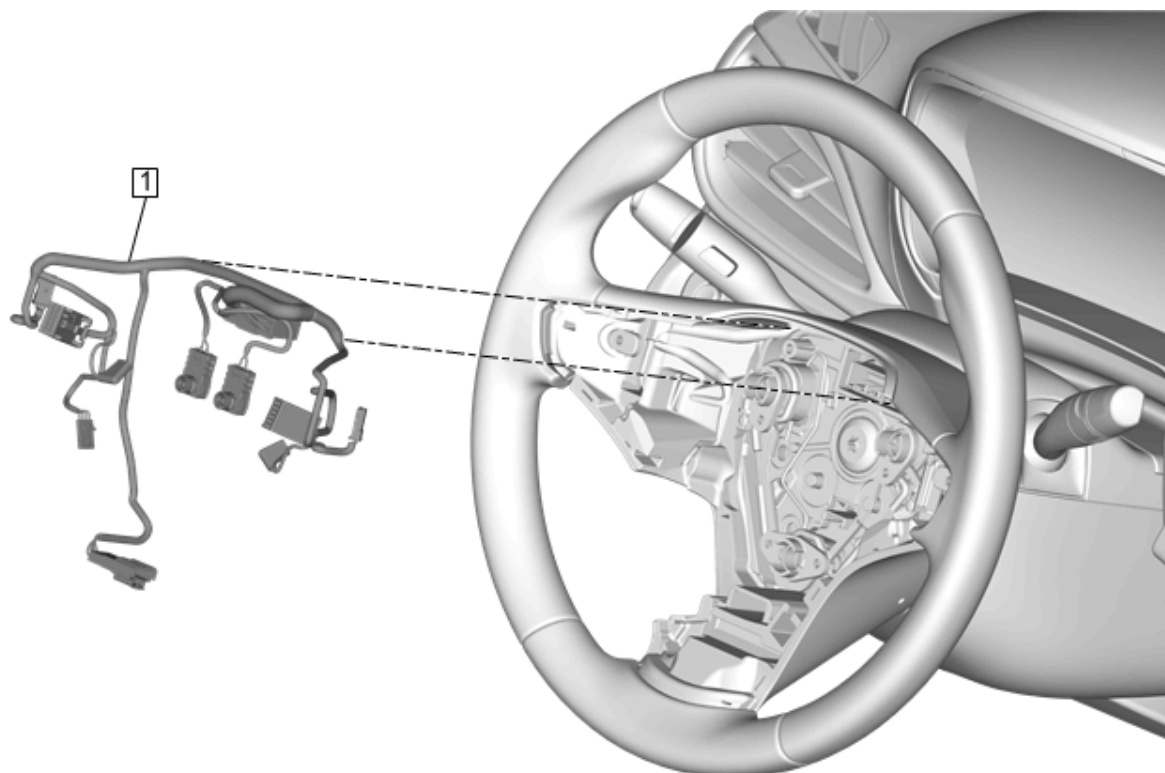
Steering Wheel Pad Accessory Wiring Harness
